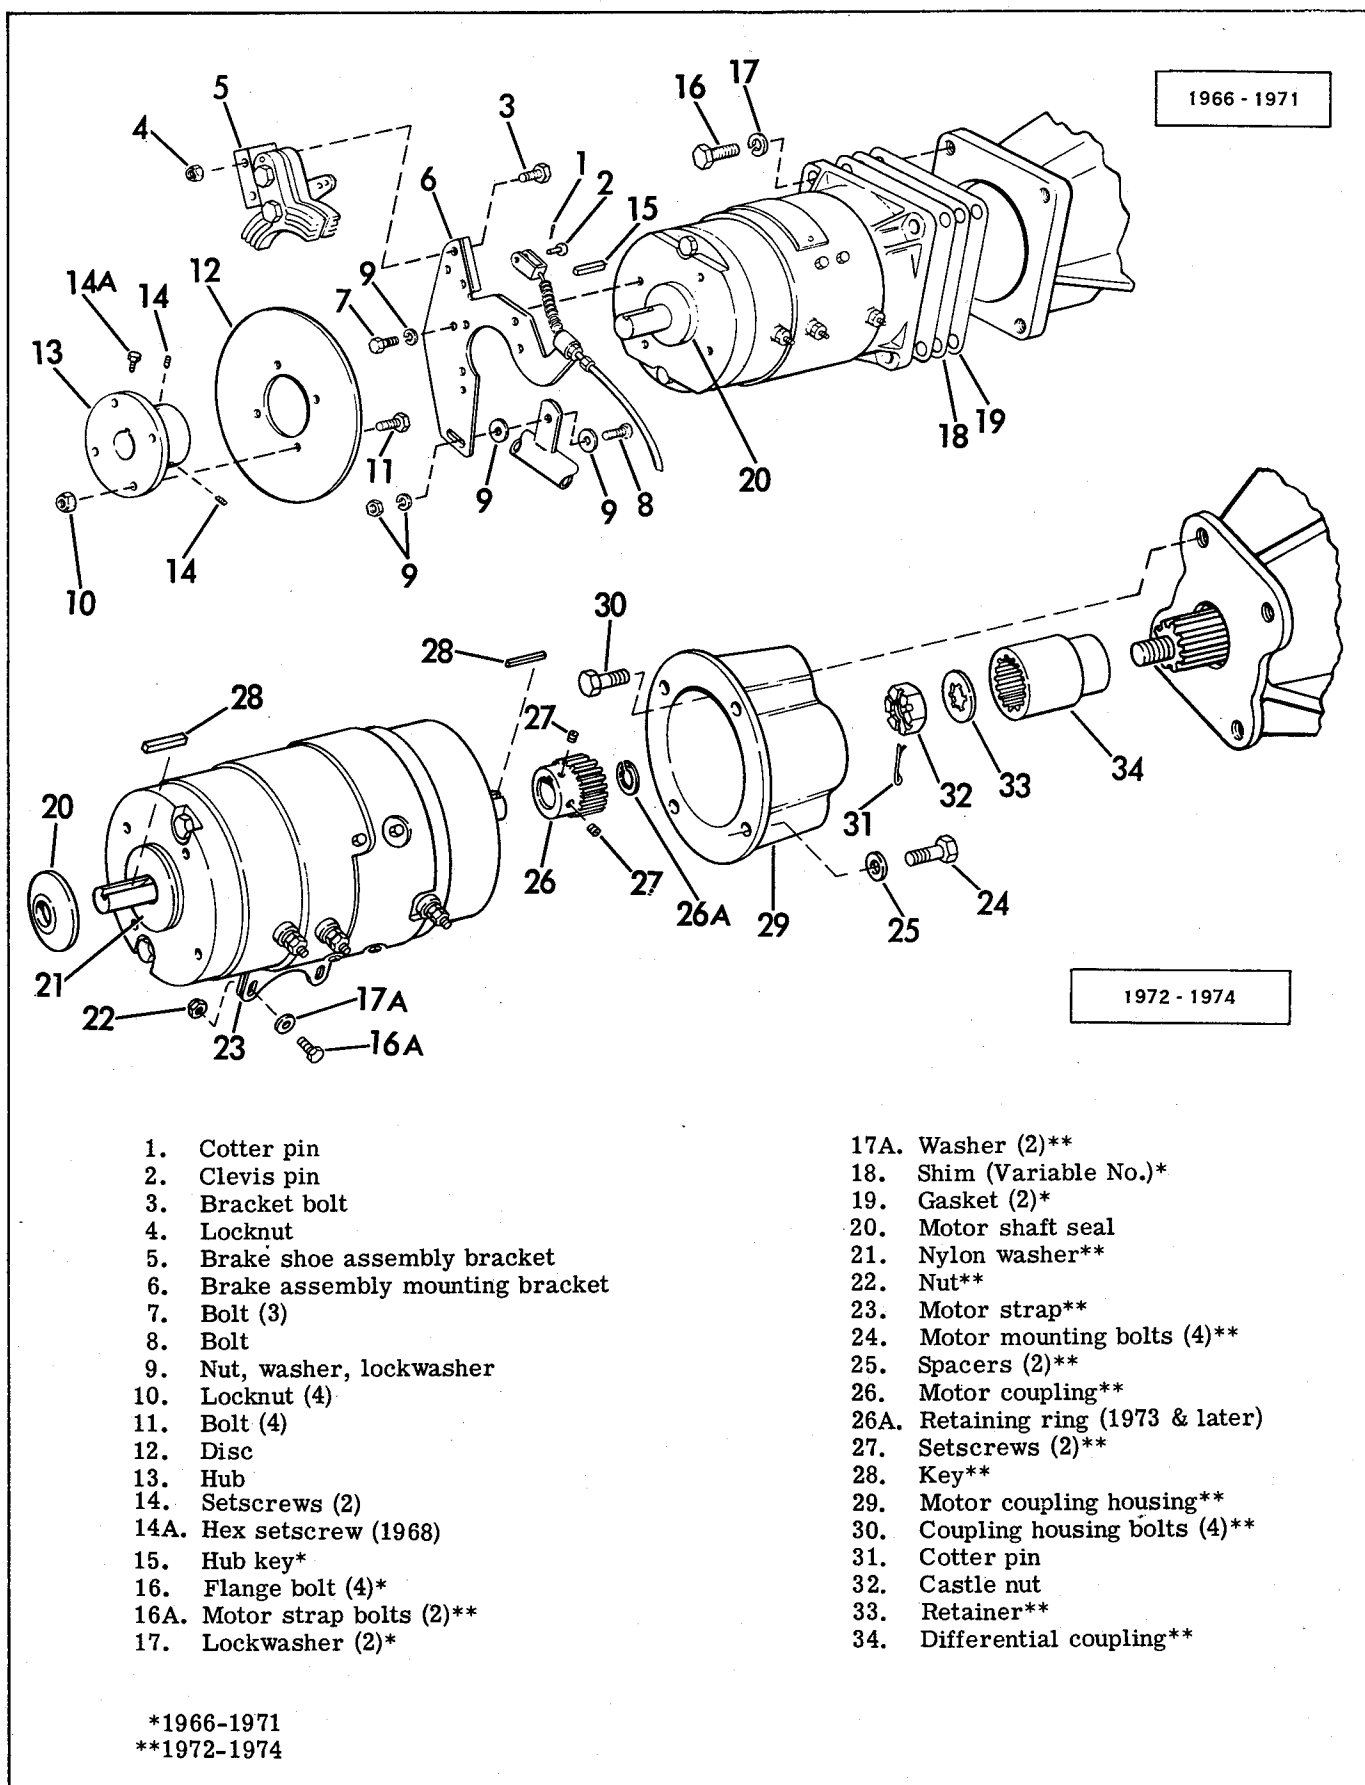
Motor and Brake Assembly (1966-1974 Models) - Exploded View
